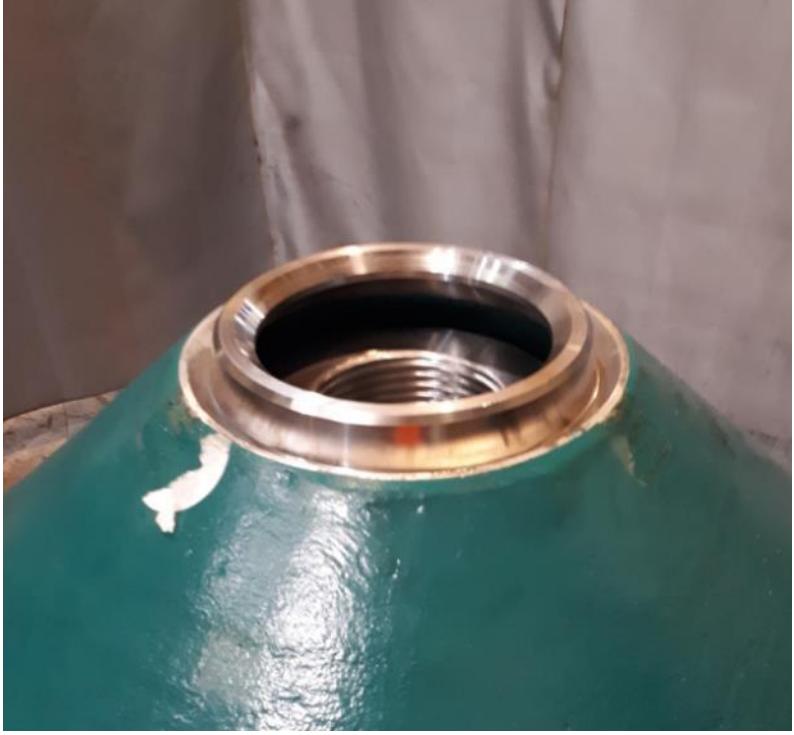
Head bolt covered with a wear cap and sealed by silicone during assembly.
